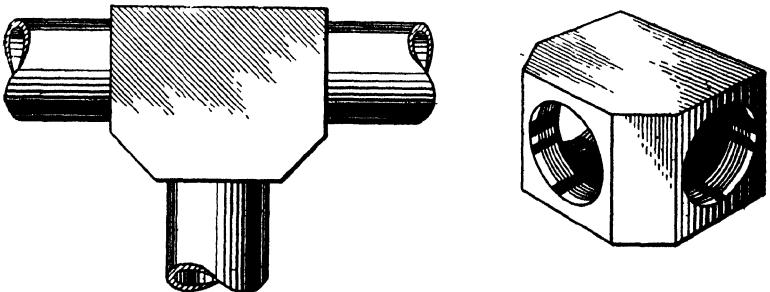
TEE JOINT PRODUCED IN THE FOLLOWING SIZES: 1 in., 1½ in., 2 in., 2½ in., 3 in. and 4 in.
